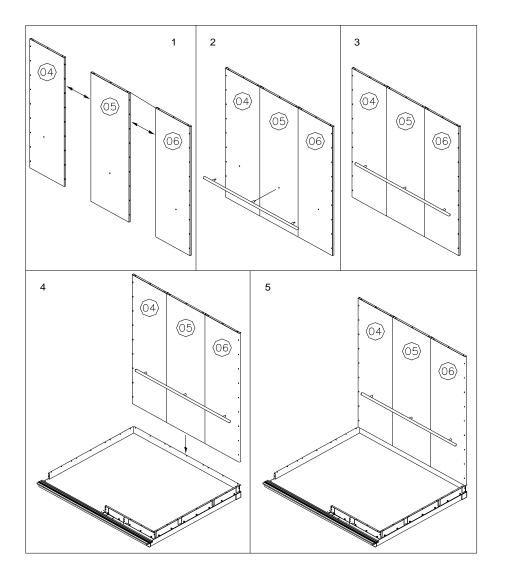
C. CAR PANEL(REAR) ASSEMBLY
